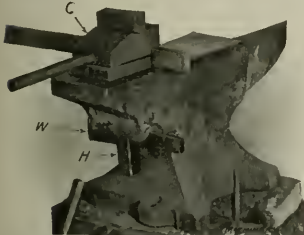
Tool Cut Off and Clamped to Anvil ready to be Bent Down.
